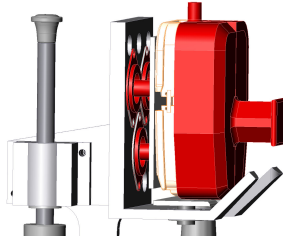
Compliant elements are used to mount tool mating surfaces to the TRS carousel. Modified tool housing (red) shows gripping fixture projecting to right. RFID tag is mounted inside gripping fixture.
